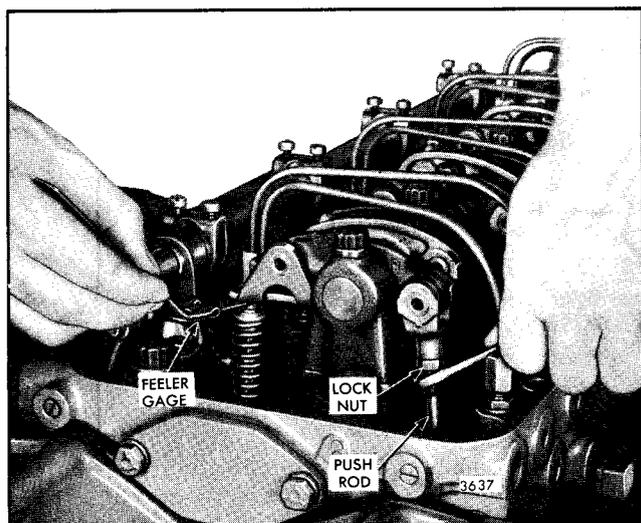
Adjusting Valve Clearance (Four Valve Head)
